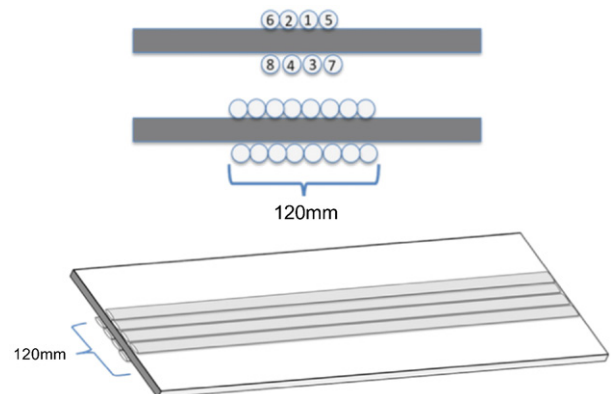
Welding procedure for the fabrication of fully weld-affected plates.
